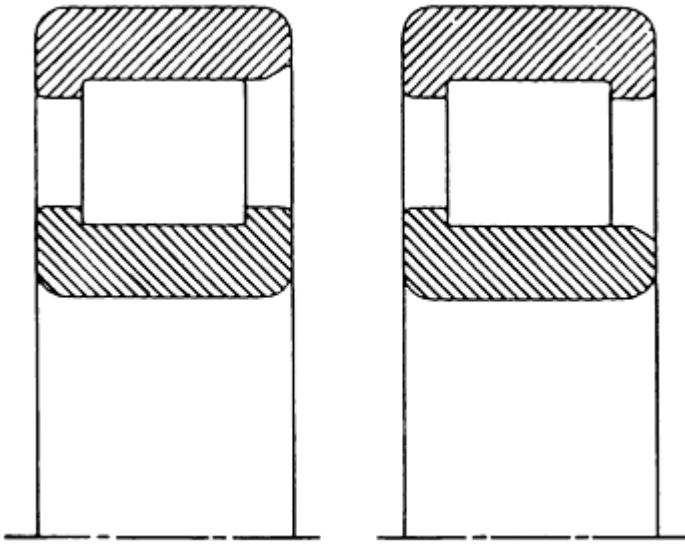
Radial cylindrical roller bearing with guide flanges on both inner and outer rings
